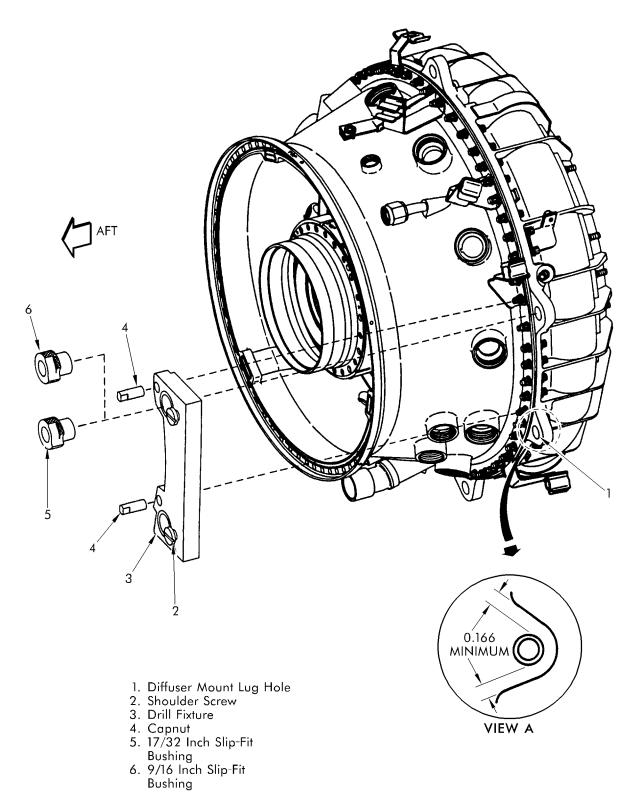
Lug Hole Drill Fixture (Typical); Installation and Removal
